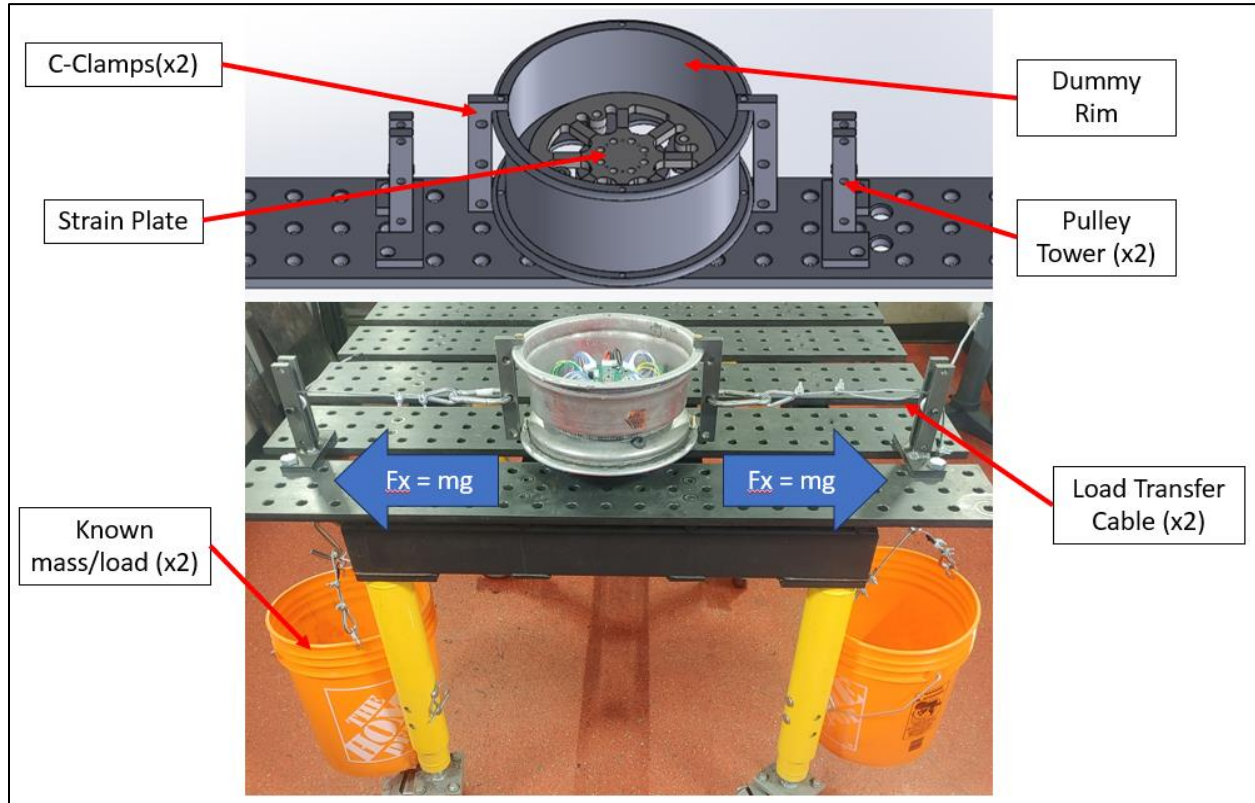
The final assembled calibration jig (bottom) applying a known force in the X-axis. The CAD above has been included for reference.
